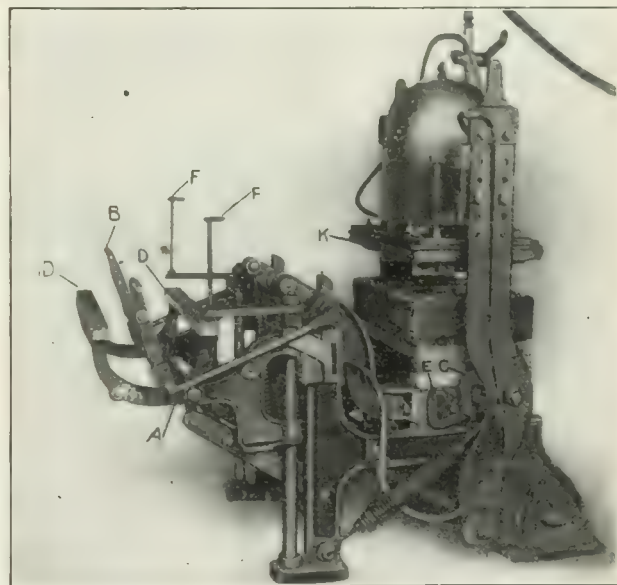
The Power-Ramming Roll Over Core Machine Built by the Elmira Foundry Company, Elmira, N. Y.
